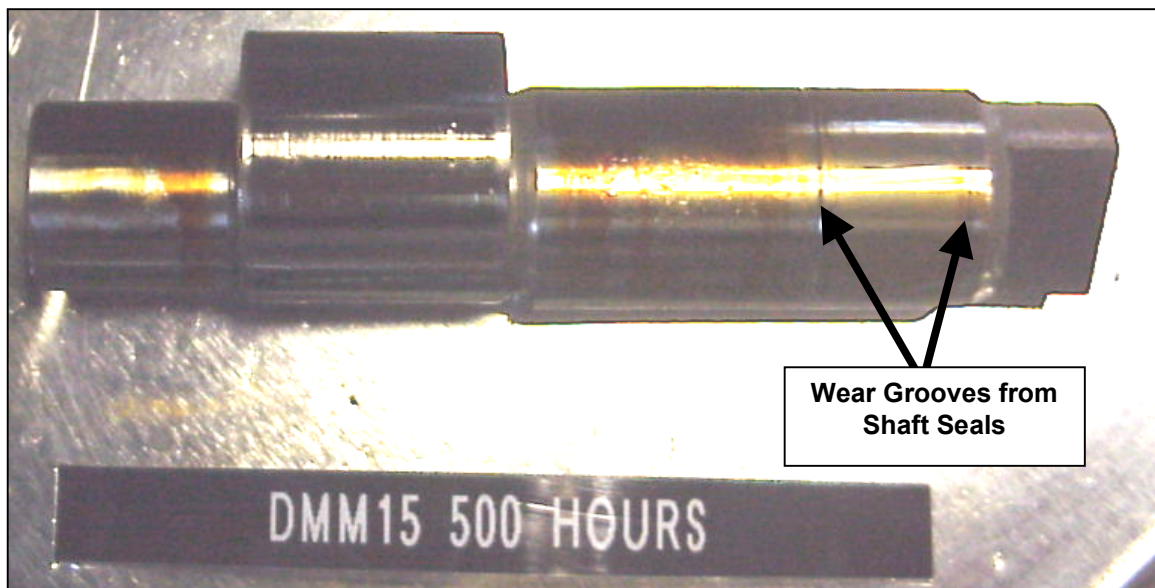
DMM15 (Test 6) Pump Camshaft with Deposits
